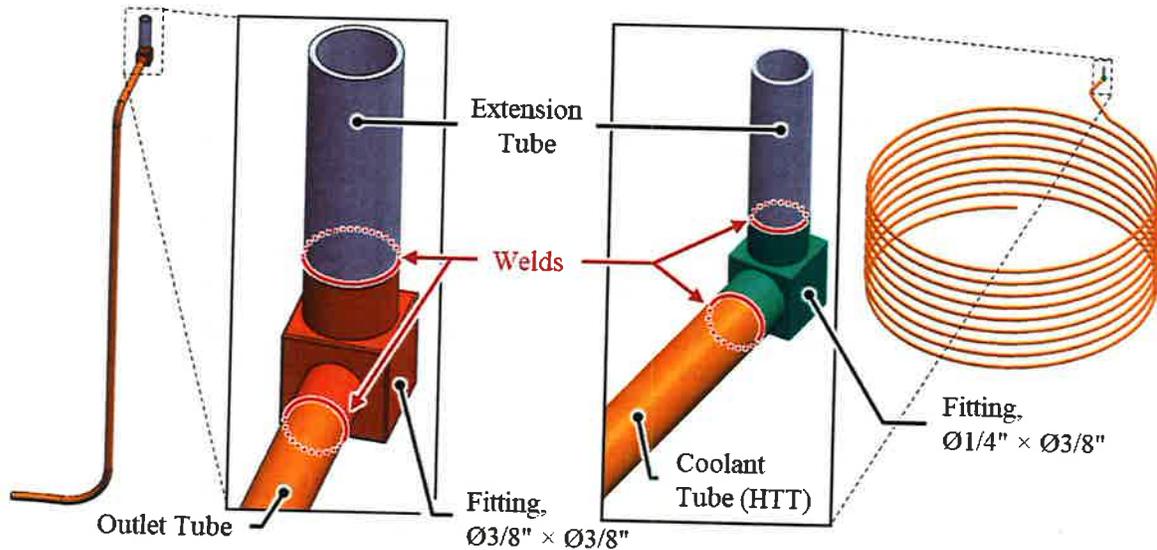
Welds to leak and pressure test on the HTT Return (left) and Inlet (right) Lines
